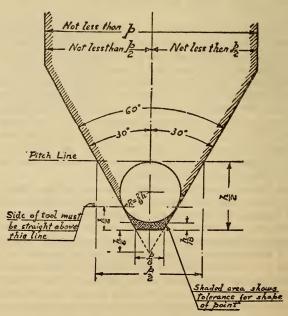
Shape for cutter or single point lathe tool not intended to trim crest of thread
